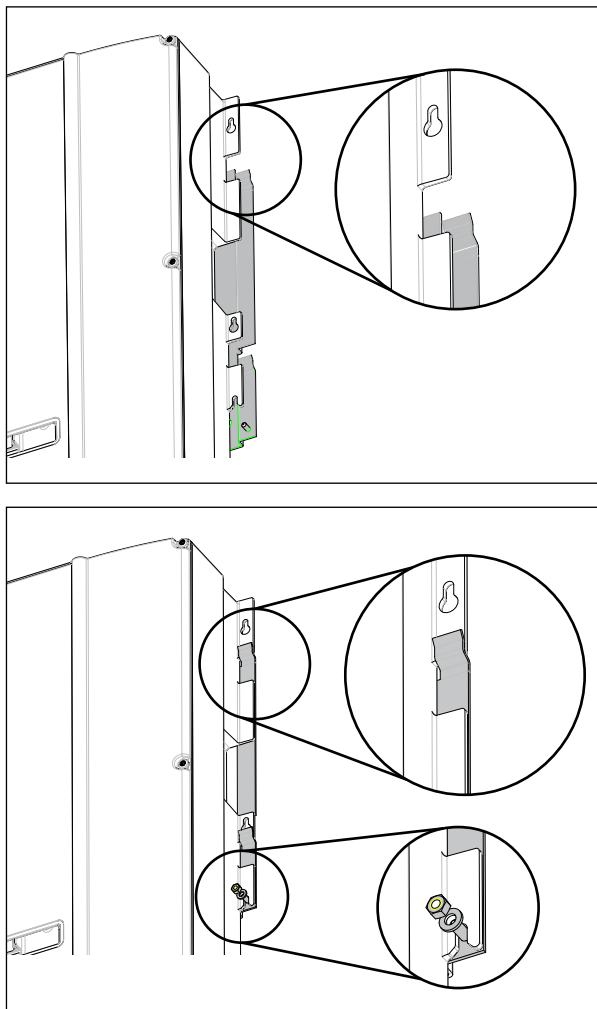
Attaching the solar power inverter to the mounting plate
